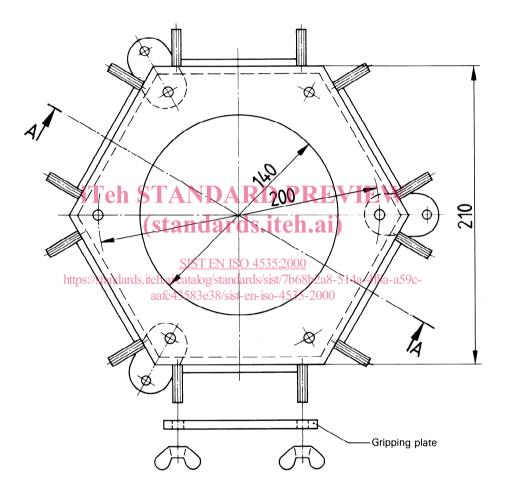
Top view of hexagonal vessel without lid and paddle stirrer
